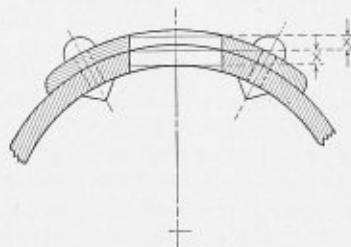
Impractical Method of Riveting Curved Surfaces
